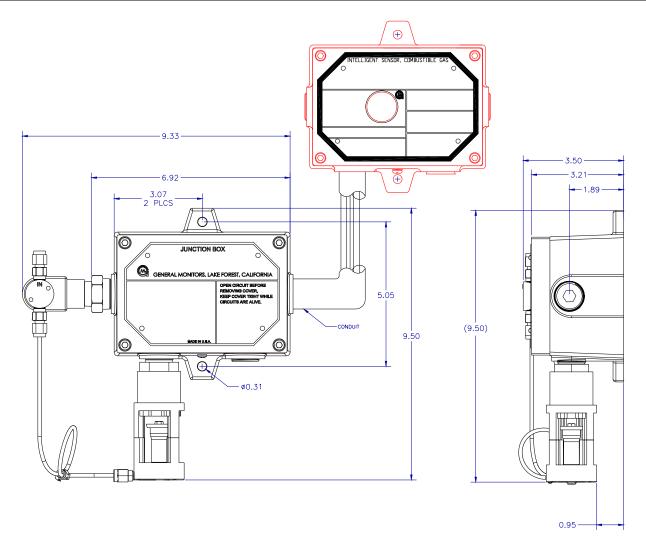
ARGC with Remote Junction Box (80155-1) With S4000CH Dimensions and Outline Drawing
